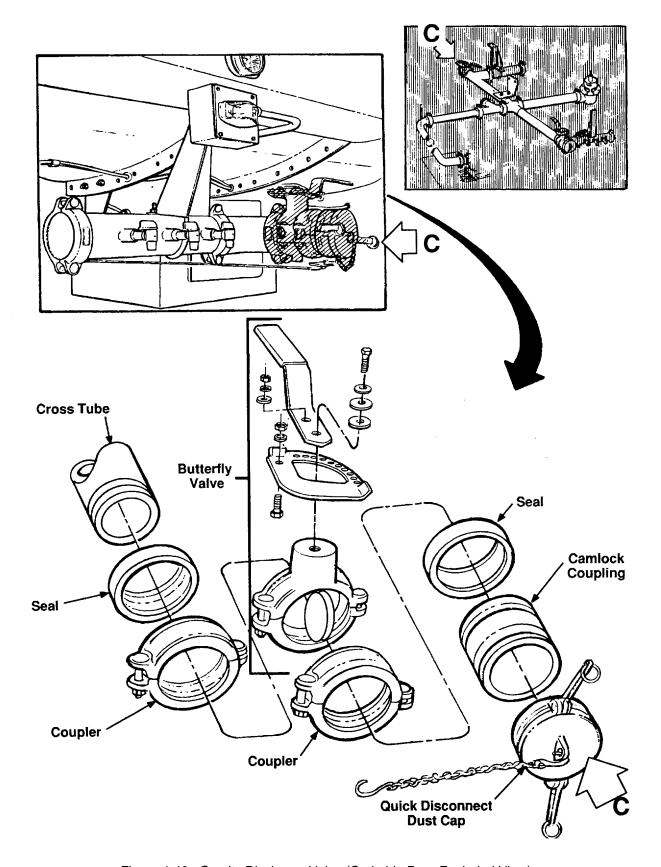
Gravity Discharge Valve (Curbside Rear Exploded View)
